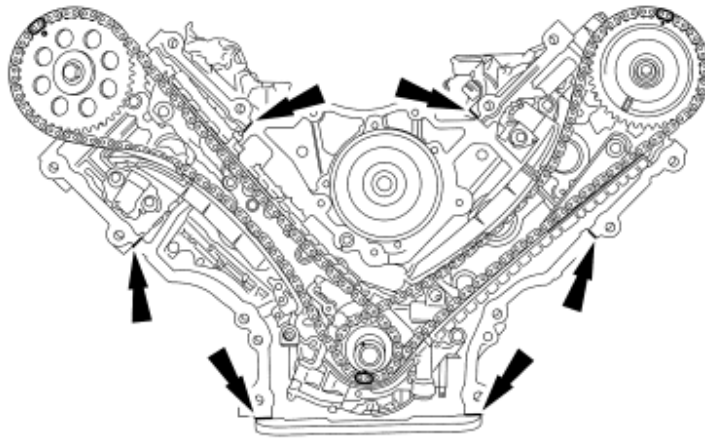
Applying Sealant At Head-To-Block Surface & The Oil Pan-To-Block Surface
